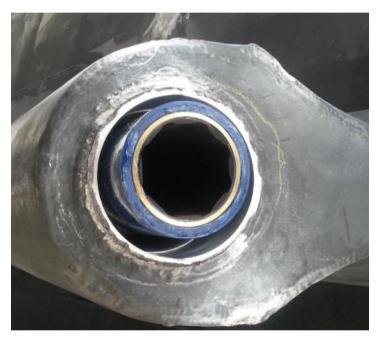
The resin inner tube mounted into aluminum outer tub of shaftlines strut [author's photo]
